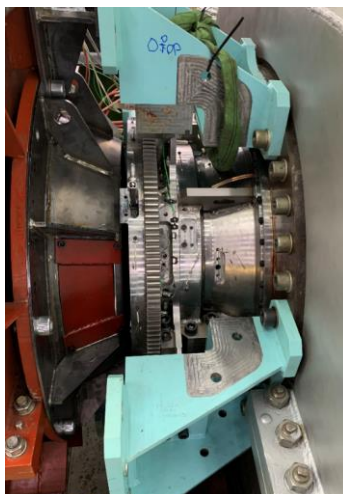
2-spool rig 2 assembly at TU Graz (FWD rig side completed with HPT)
